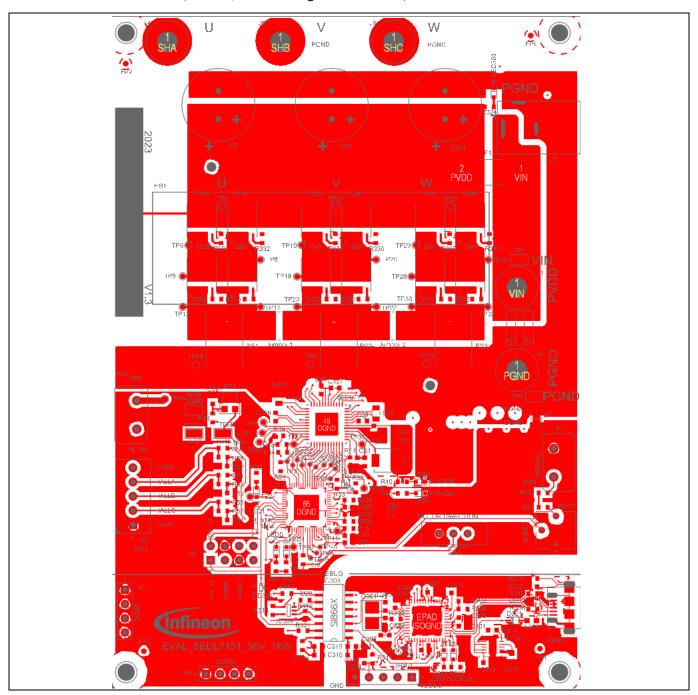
EVAL_6EDL7151_36V_1kW PCB top layer with silkscreen
